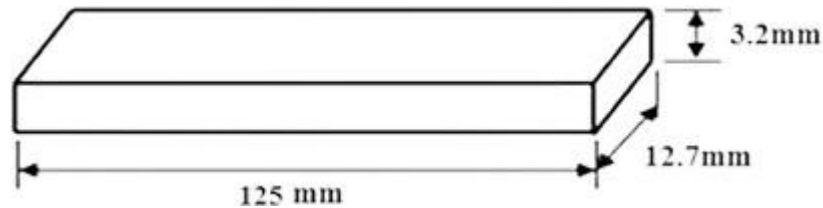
Dimension of Flexural Test based on ASTM D790
